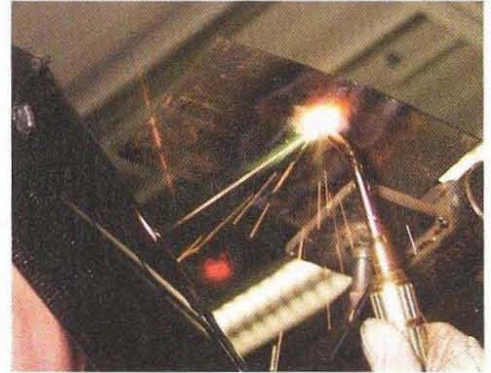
The filler metal moves ahead of the torch and distributes the molten weld pool as it is moved.
